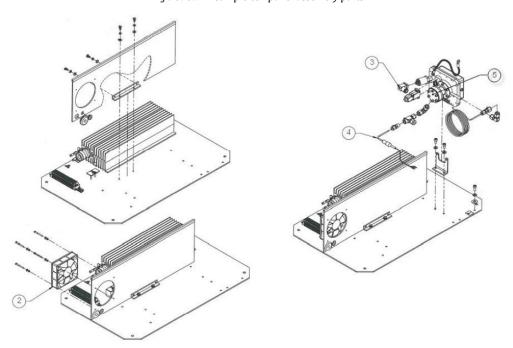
0.1 m sample cell panel assembly parts (Continued)
